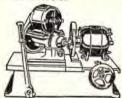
An electric-motor-driven valve-face grinding ma-chine. This machine is over-ated with two electric motors. one of them drives the grinding wheel at 3,450 r.p.m., and the other operates the work spindle through a gear reduction, making a final speed of 430 r.p.m.
